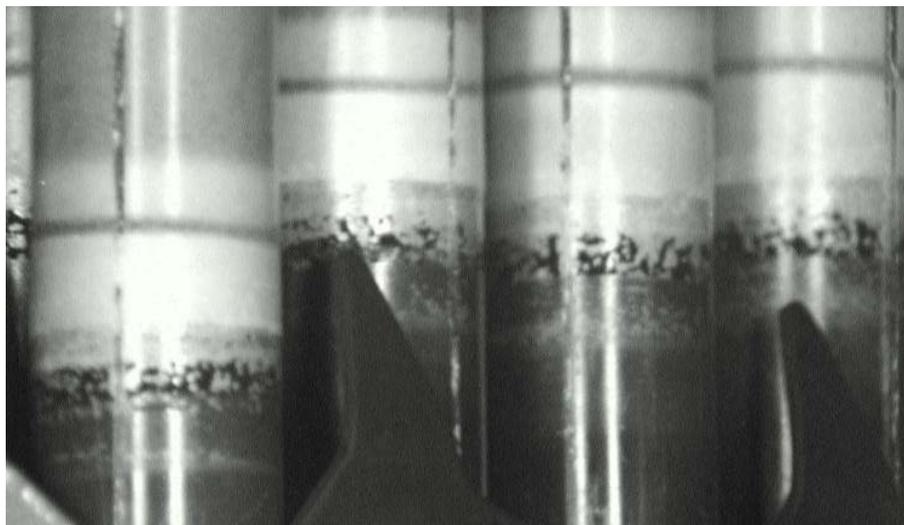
Weld joints of bottom end plugs, WLTA AA02-03, face 4.
